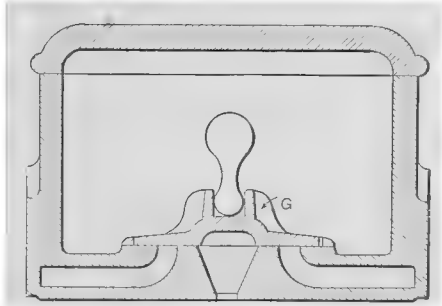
Sectional view of valve-chest, Guild & Garrison pump.
